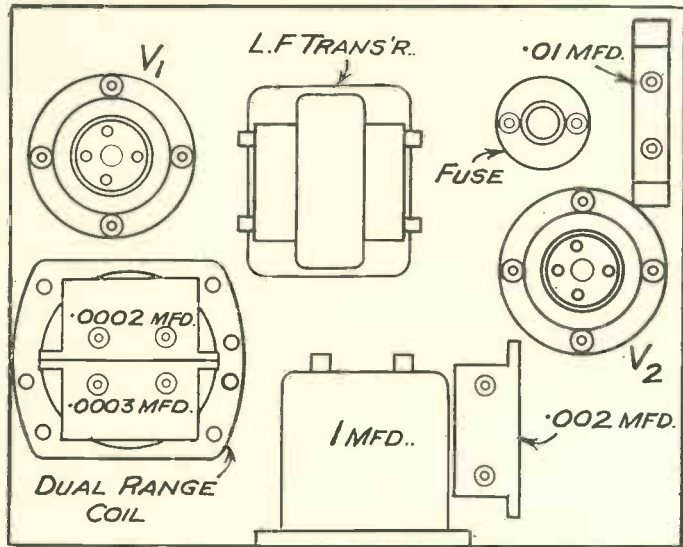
LAYOUT OF COMPONENTS ON THE BASEBOARD.
